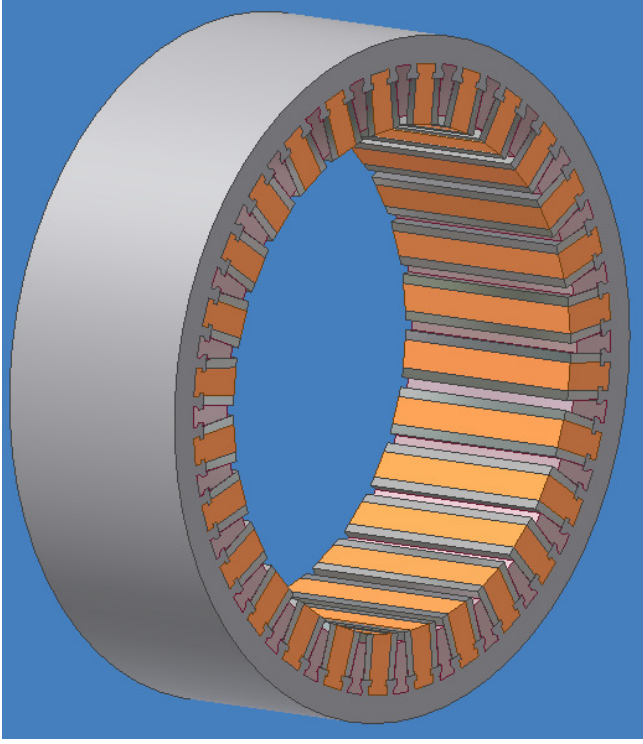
Rotor of the Clawpole TFM: toothed rotor version.
